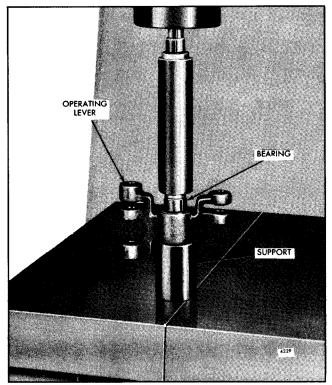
Installing Control Link Operating Lever Bearings in Lever using Tool J 21068
